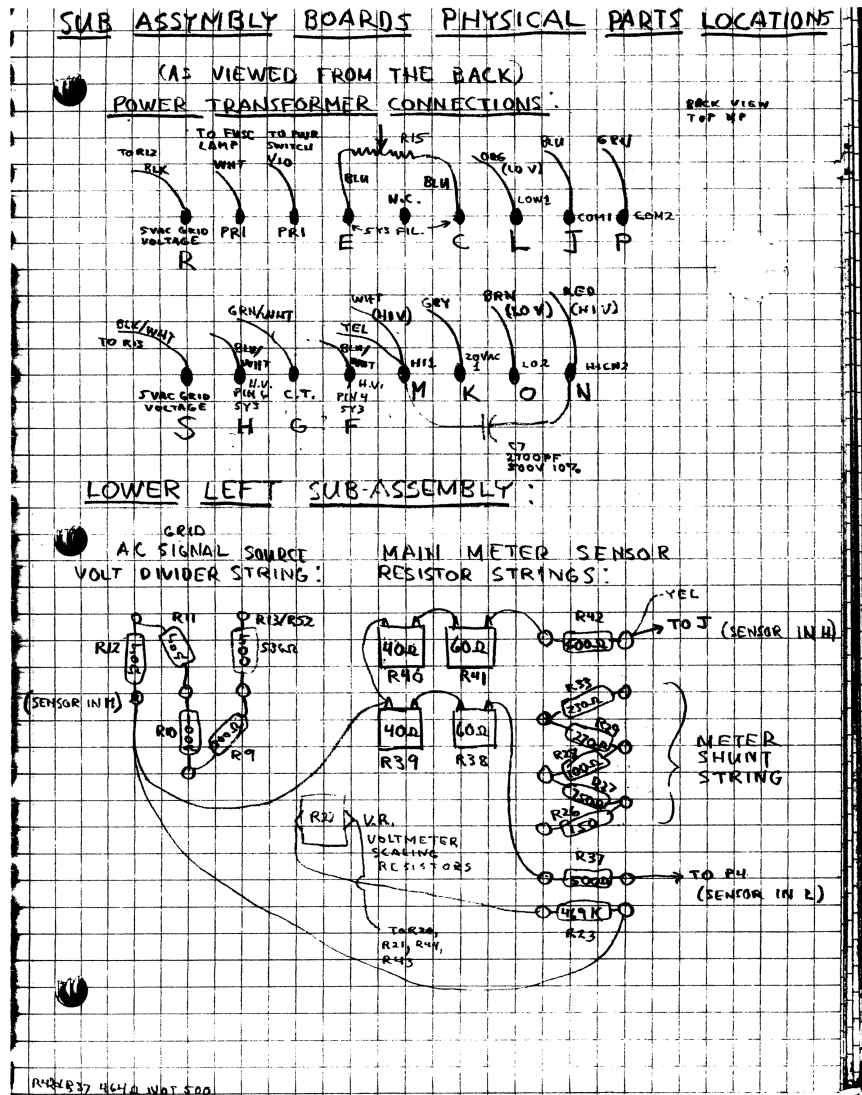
Subassembly Boards Physical Parts Locations, Part 1
